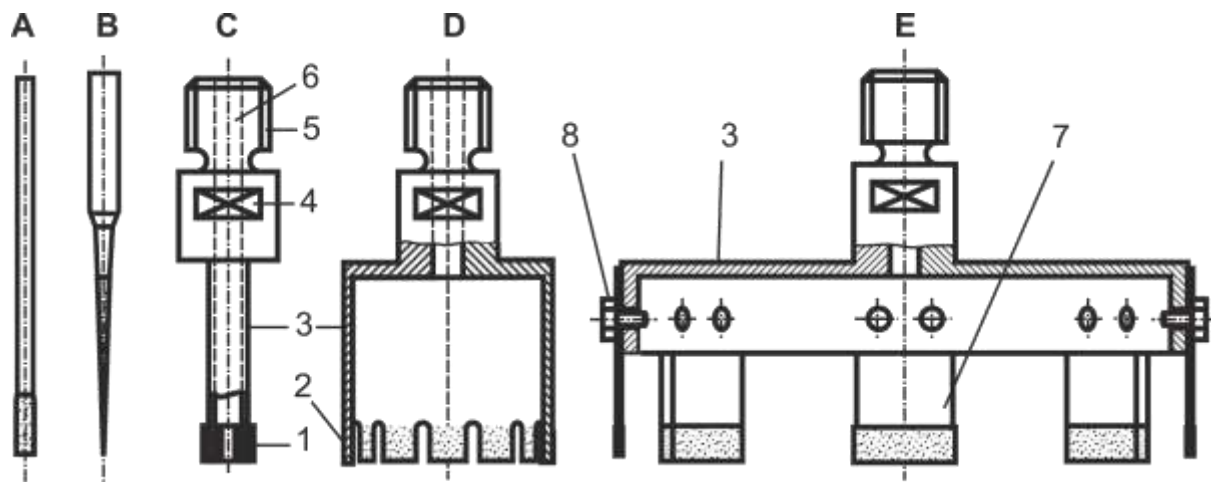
DIA drill bits: A - diamond-coated rod drill bit, B - bar drill bit, C - tubular drill bit with solid crown, D - segmented, E - with screwed segments, 1 - diamond crown, 2 - diamond segment, 3 - tubular part of the drill bit, 4 - double-sided facets for key mounting, 5 - threaded end, 6 - coolant supply hole, 7 - diamond segment, 8 - screw
